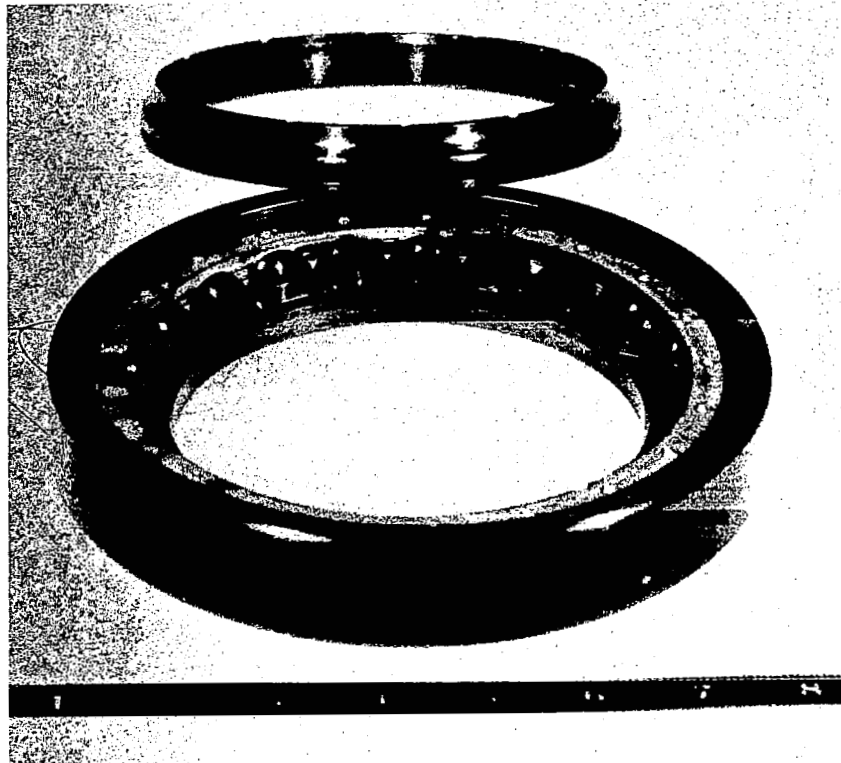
Post-Test Appearance of Drilled-Ball Bearing S/N 2552A-1 Before Disassembly With Thrust-Loaded Inner Ring Removed
